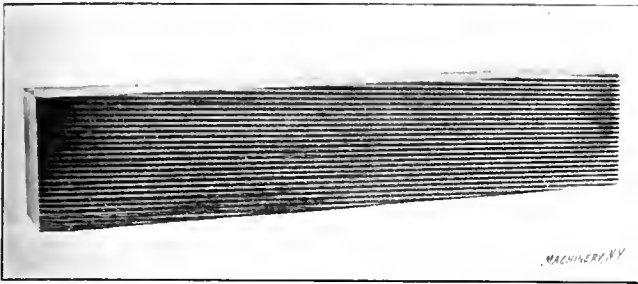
A Thread Rolling Die for Rolling United States Standard Threads
